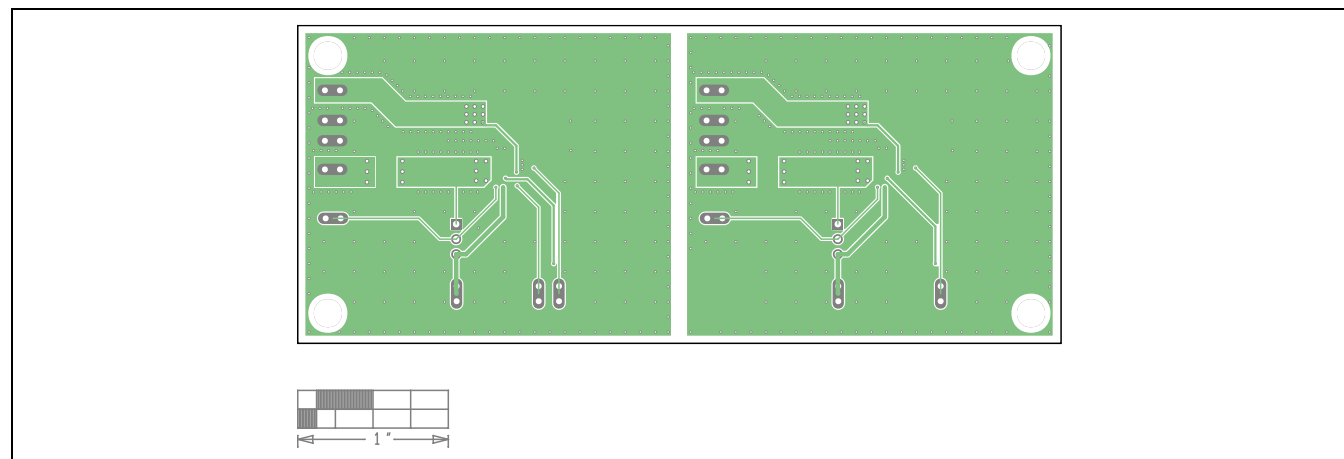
MAX17570A/MAX17570D EV Kits PCB Layout Diagram—Layer 3
